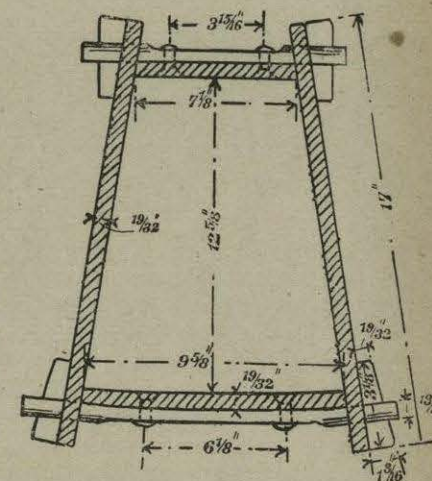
Iron Mould for Hand-rammed Basic Brick.
